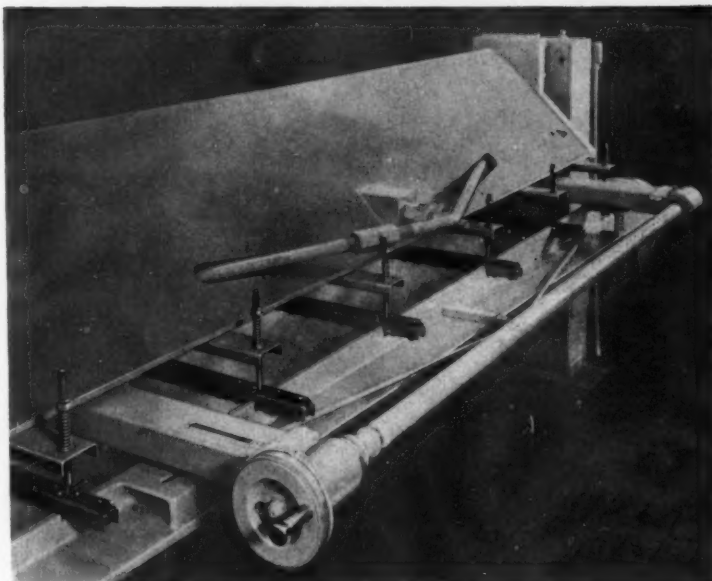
Overhead view of Niagara magnetic sheet support installed on underdrive shear
